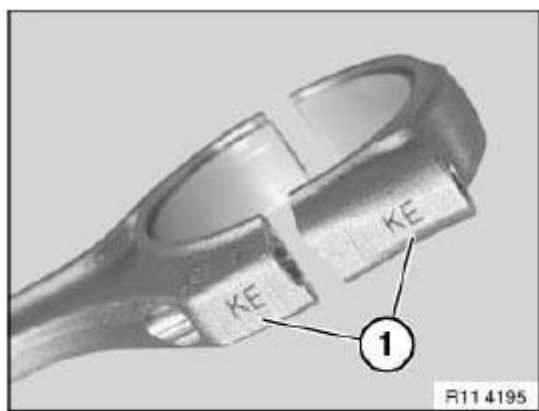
Identifying Connecting Rod And Connecting Rod Bearing Cap With Pairing Letters
